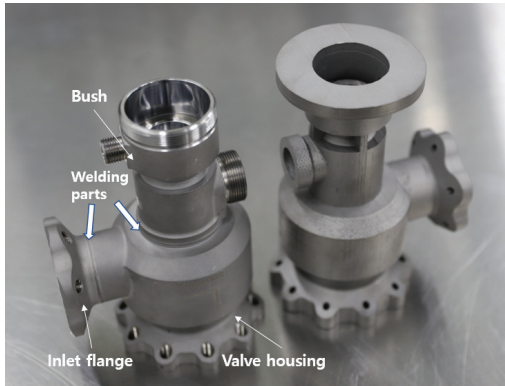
End product of the valve housing manufactured by machining and welding (left) and intermediate product of valve housing produced by AM prior to final machining (right).
